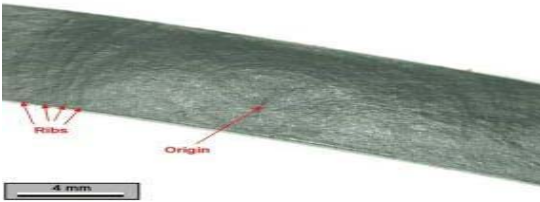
Explosive decompression fracture of rubber O-ring, characterized by fish-eye-like patterns. [2]
